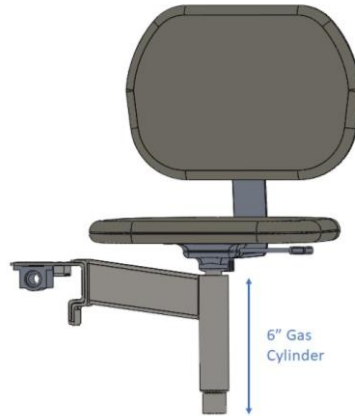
Side Leg Trainer Seat and Cantilever Mounting Arm
